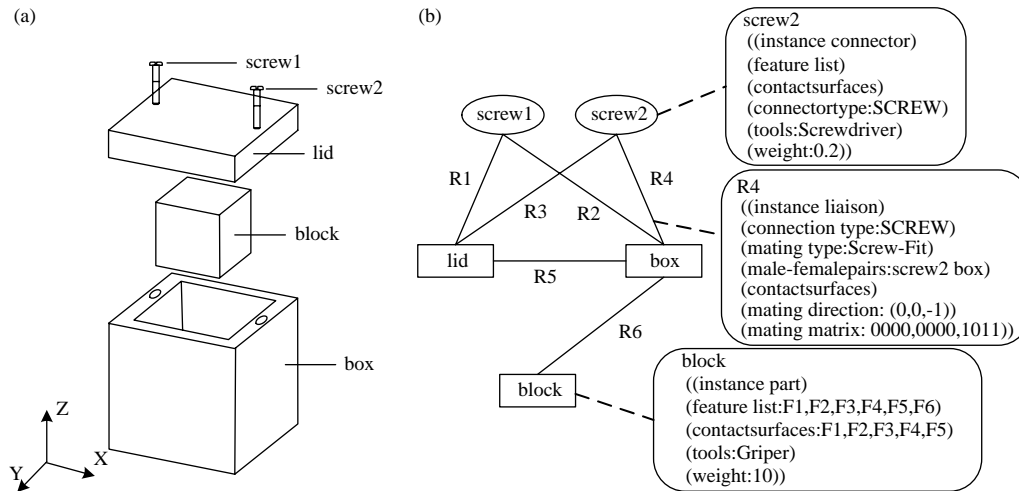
An example of CSBARM: (a) the container assembly; (b) its CSBARM.
